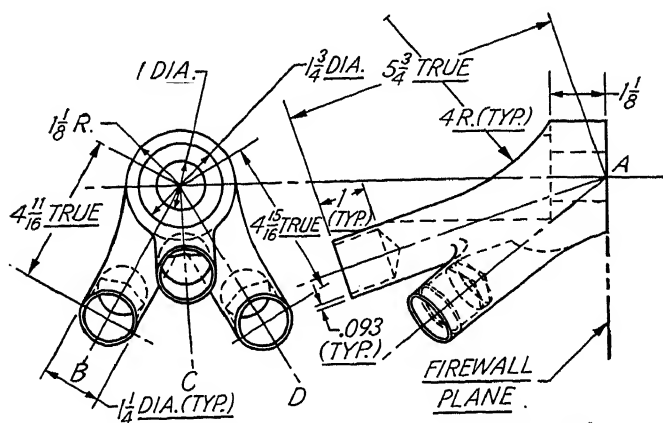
Fitting—engine mount aft upper inboard.
